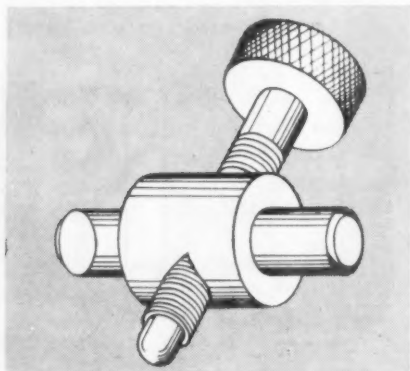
Drawing of swinging clamp in which the pivoting member is a three-diameter affair with straddle journals.
